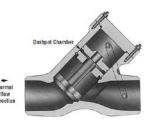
Schematic drawing of Controlled Closure Check Valve (CCCV) [3]
